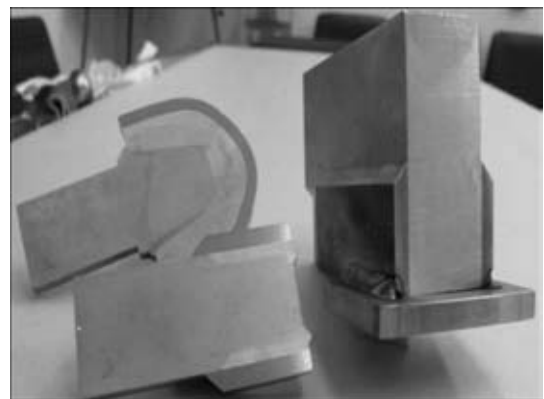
Macrosections and appearance of an assembly after welding-in of transition piece to steel structure elements
